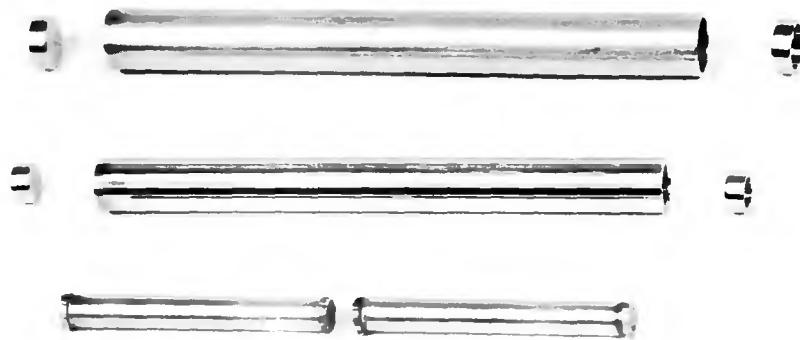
Assembled Specimen Tubes, Inner Capsule and Outer Capsule Components
